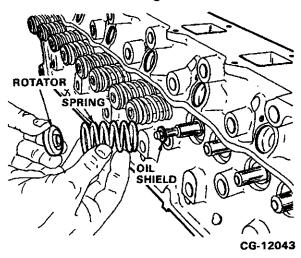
Remove Valve Rotator, Spring and Oil Shield (Engine S/N 72706 and Below Shown)
